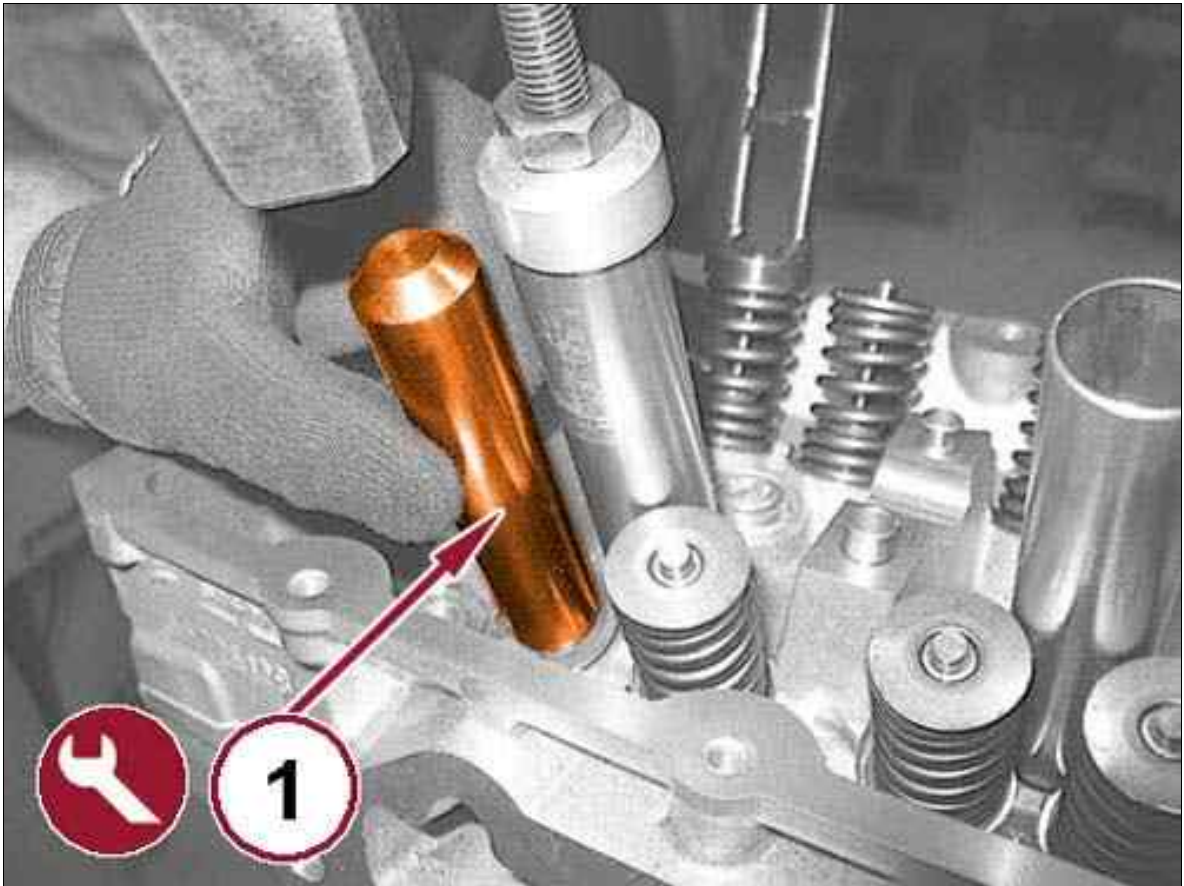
Positioning Fitting Tool For Installation Of Valve Guide Oil Seal
